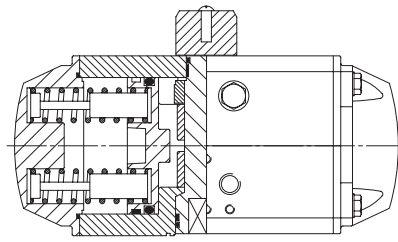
· Pfeiffer Type BR 31a Rotary Actuator
